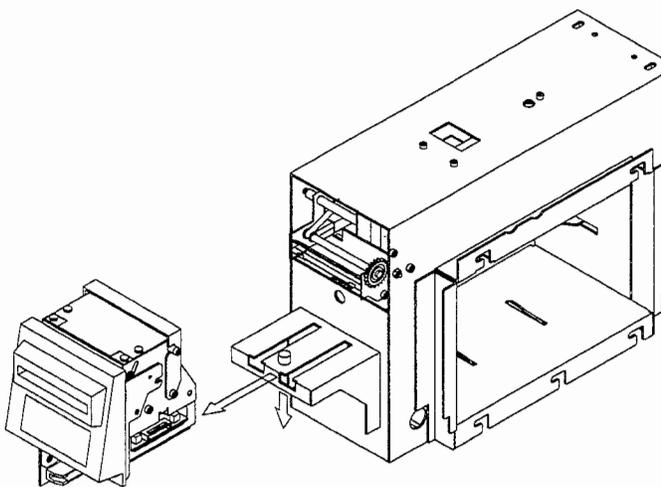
Removing the Mechanical Meter Assembly
